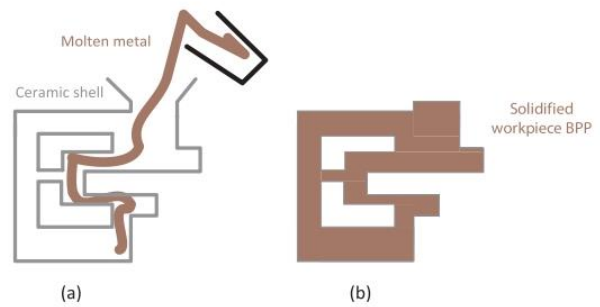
Investment casting scheme for the BPs manufacturing process: (a) preheated mould and filled with molten metal; and (b) solidified workpiece after chipping away the ceramic shell.
